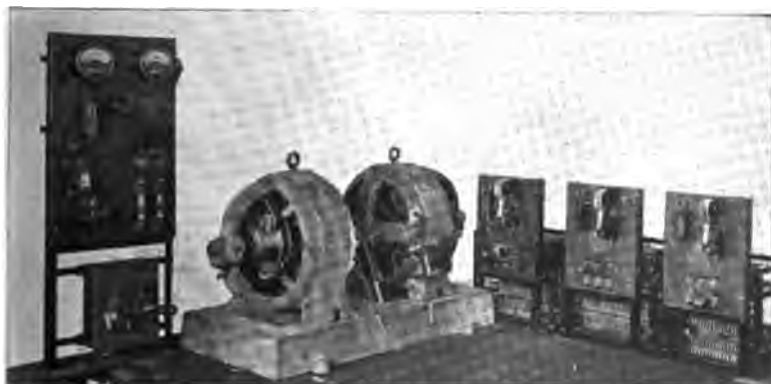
300-Ampere Welding Set with Control Panel and Auxiliary Welding Panels
